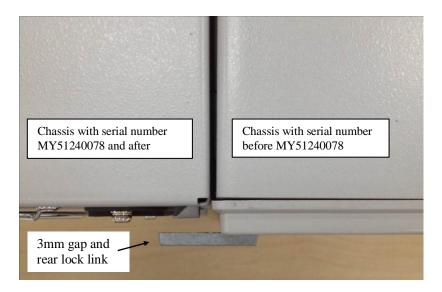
Top view 3mm gap observed on rear lock link for side-by-side rack mounting
